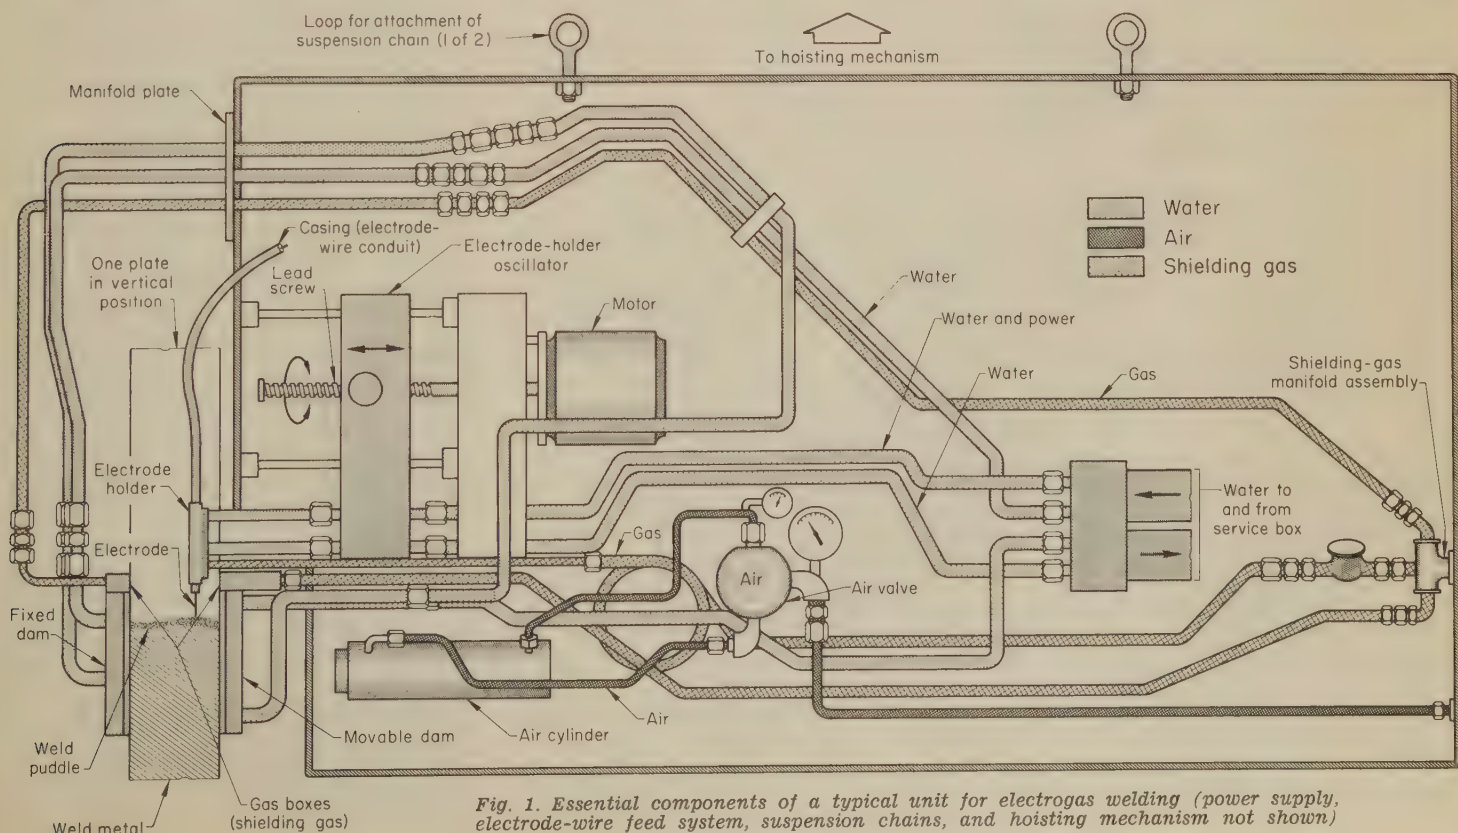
Essential components of a typical unit for electrogas welding (power supply, electrode-wire feed system, suspension chains, and hoisting mechanism not shown)
